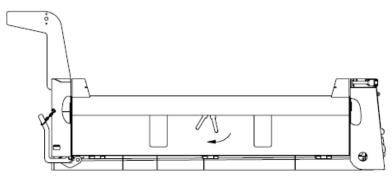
ROTATE SIDE DOOR HANDLE TO RETRACT LINKAGE PINS
